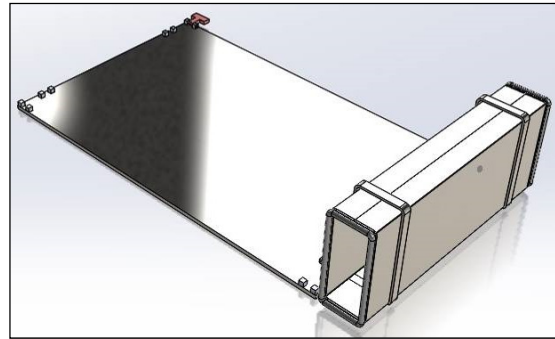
Floor Plate with Built-in Ventilation Duct
